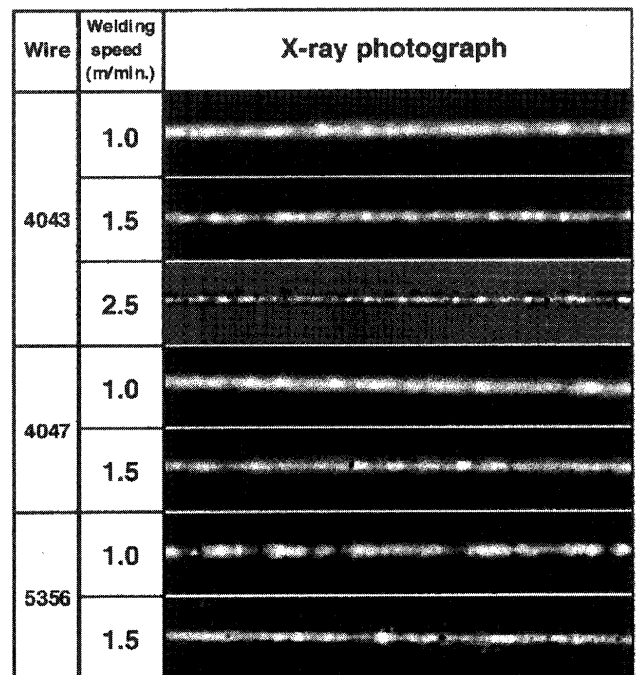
X-ray radiographs of laser welded beads at laser power 3.3kW.
